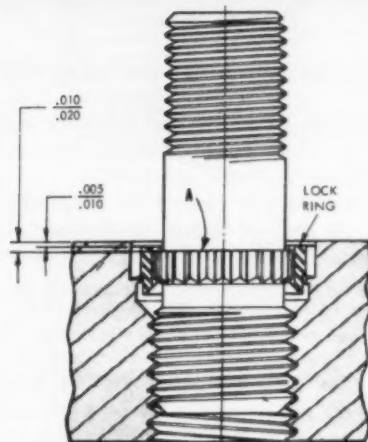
Ring-locked stud installed properly could cause a loose stud.
